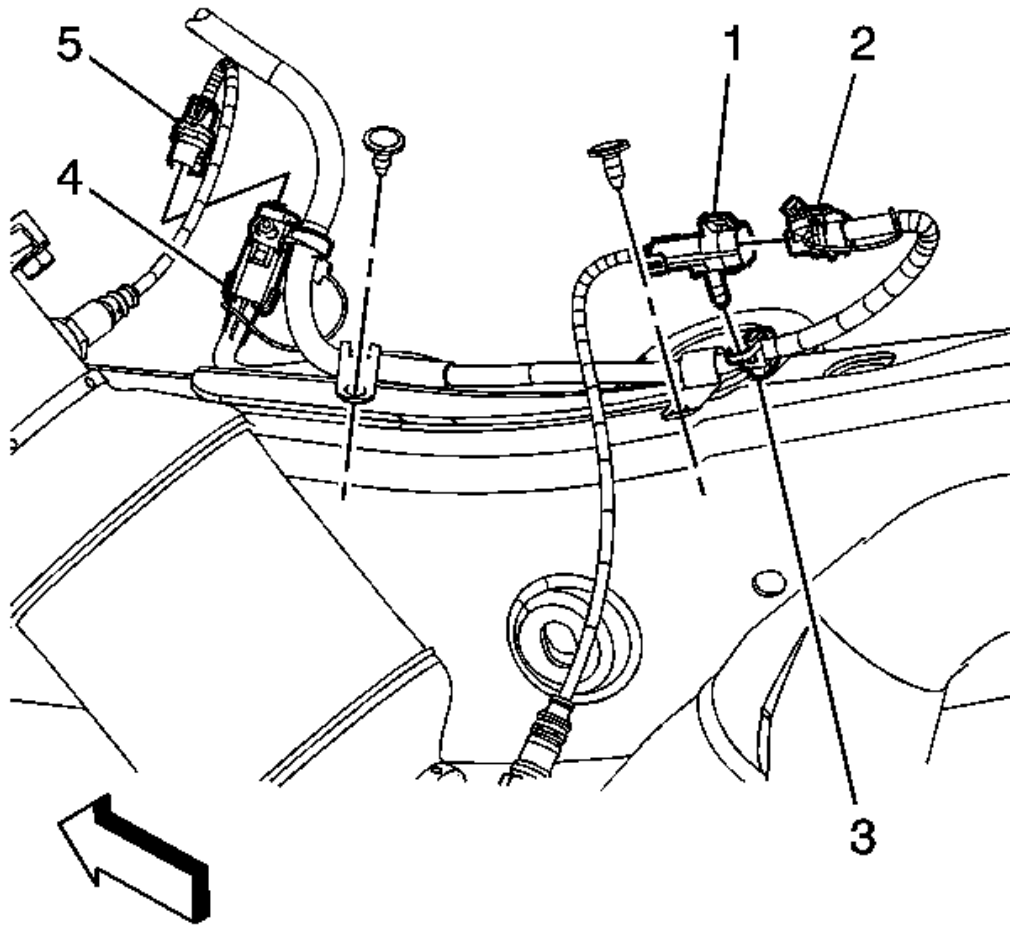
View Of Engine Harness Clip & Electrical Connectors
